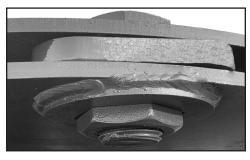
Bolt Head Bead Weld & Assembly
